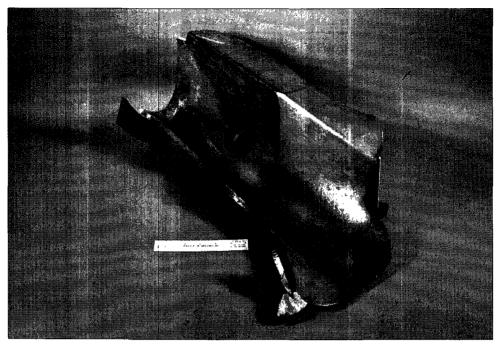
Additional views of inside diameter surfaces of burner tip.
